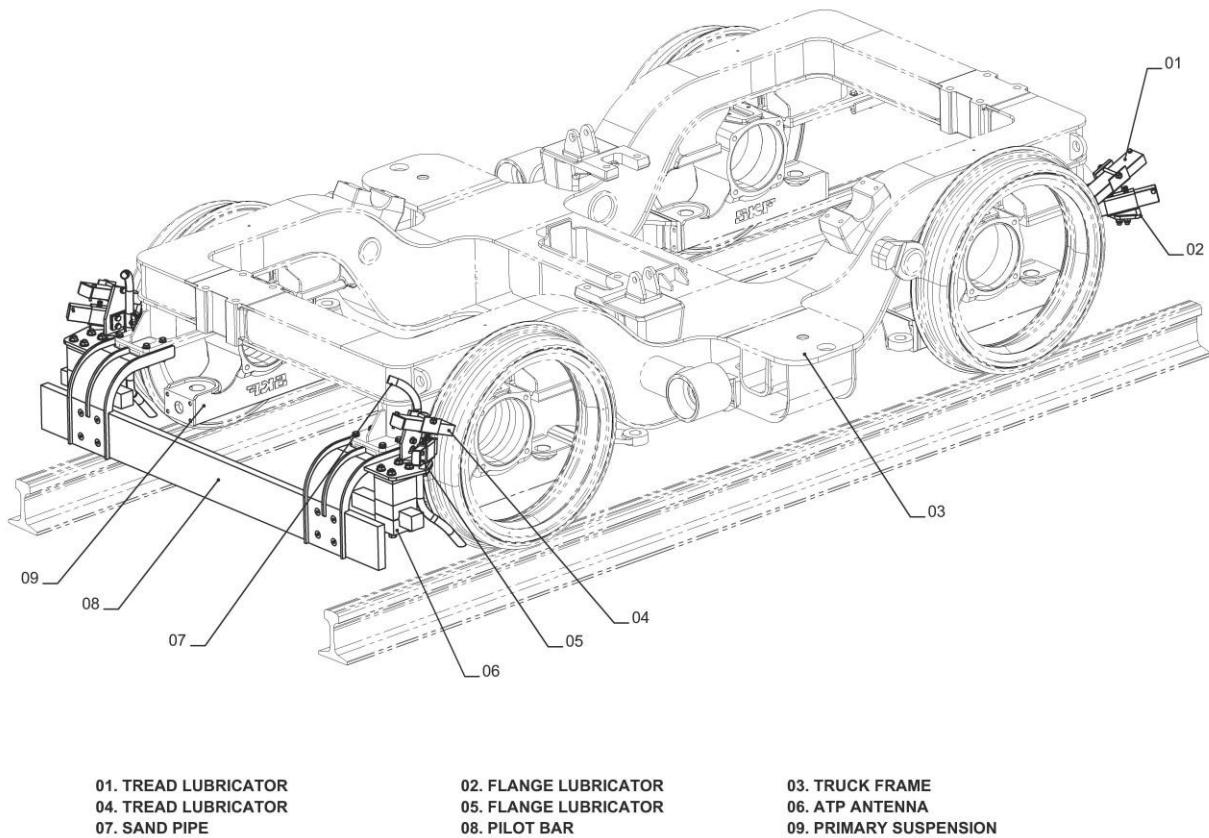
I-02.21 Pilot Bar and Wheel Flange/Tread Lubricator
